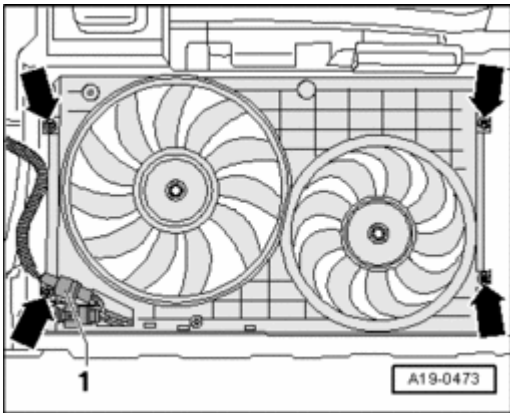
Identifying Harness Connector And Fan Mount Mounting Bolts
